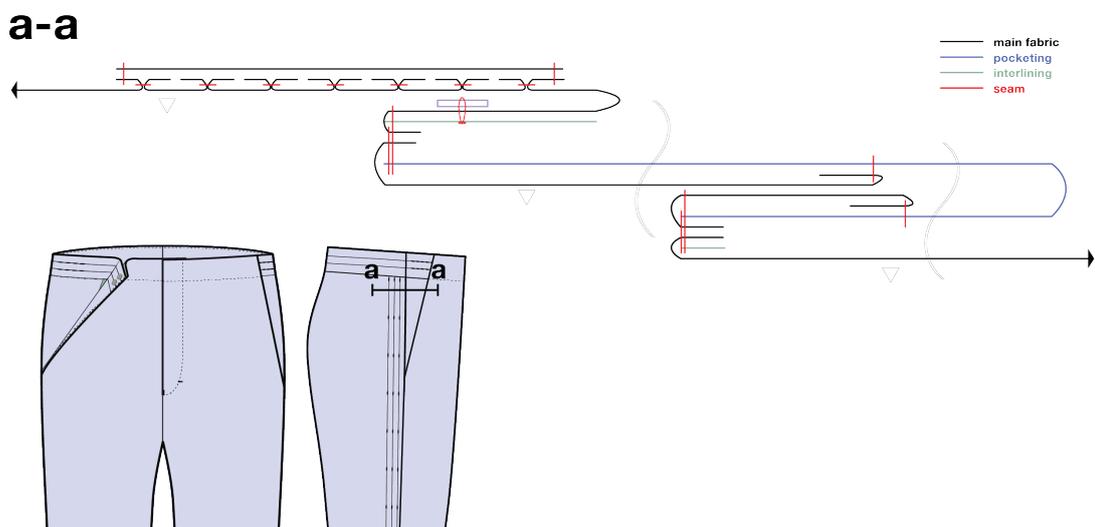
Use trousers waist adjustability mechanism construction – Tiina Ree
